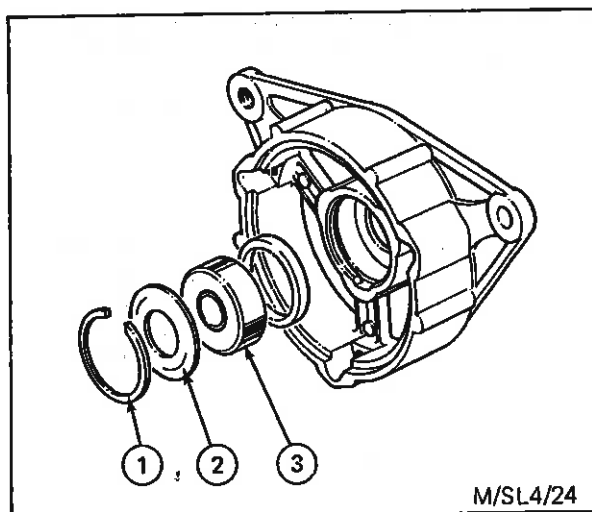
Drive End Bearing Renewal - 17 ACR'M' and A115 Alternators
